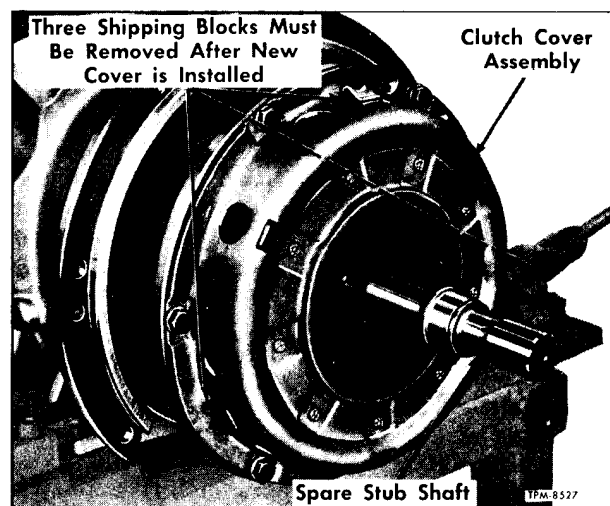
Using Spare Stub Shaft to Align Clutch Components
